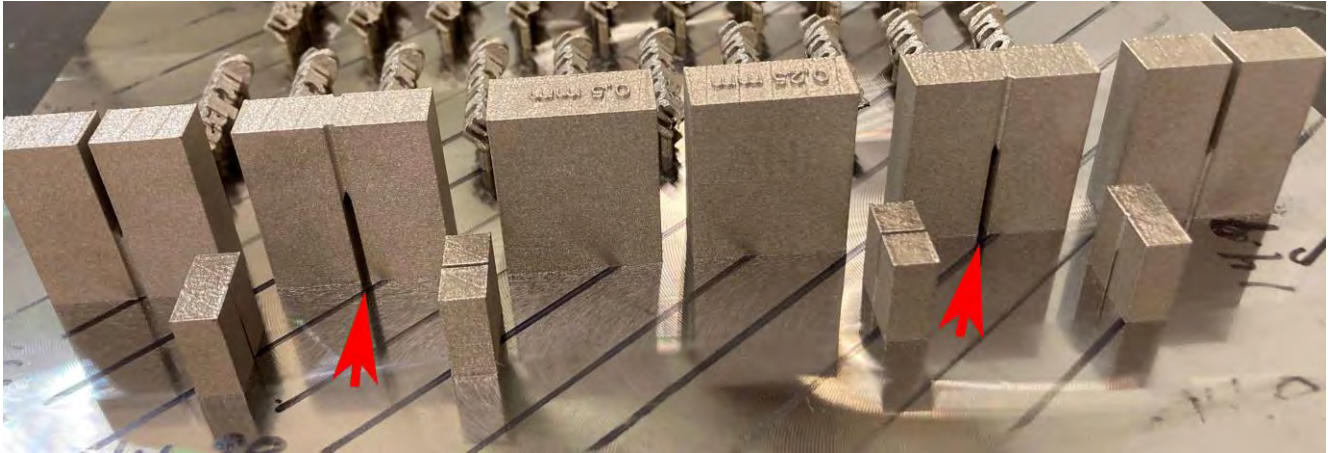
CGR/crack initiation compact tension specimens printed using the Renishaw AM400 LPBF system. Specimens with similar geometry, printed with the notch “UP”, differing only at notch - “as printed” vs “machined” are evaluated for crack initiation simultaneously.
